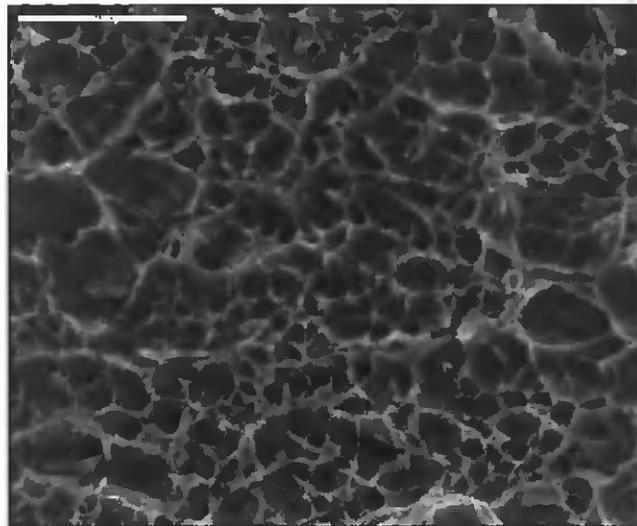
Dimples in a transverse weld specimen in AA6082
